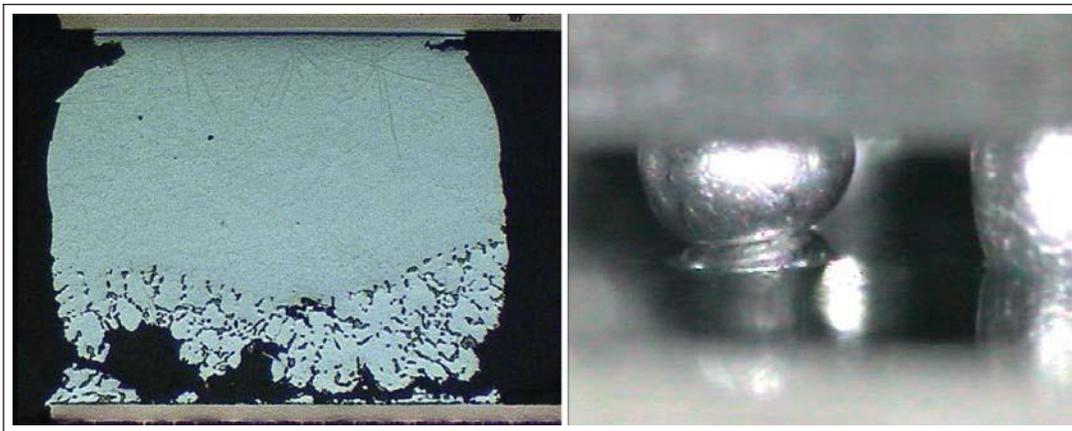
left: Non-uniform Solder Joint Microstructure, right: Incomplete Solder Joint Reflow (Head-on-Pillow) (Photo courtesy Rockwell-Collins, used by permission)
